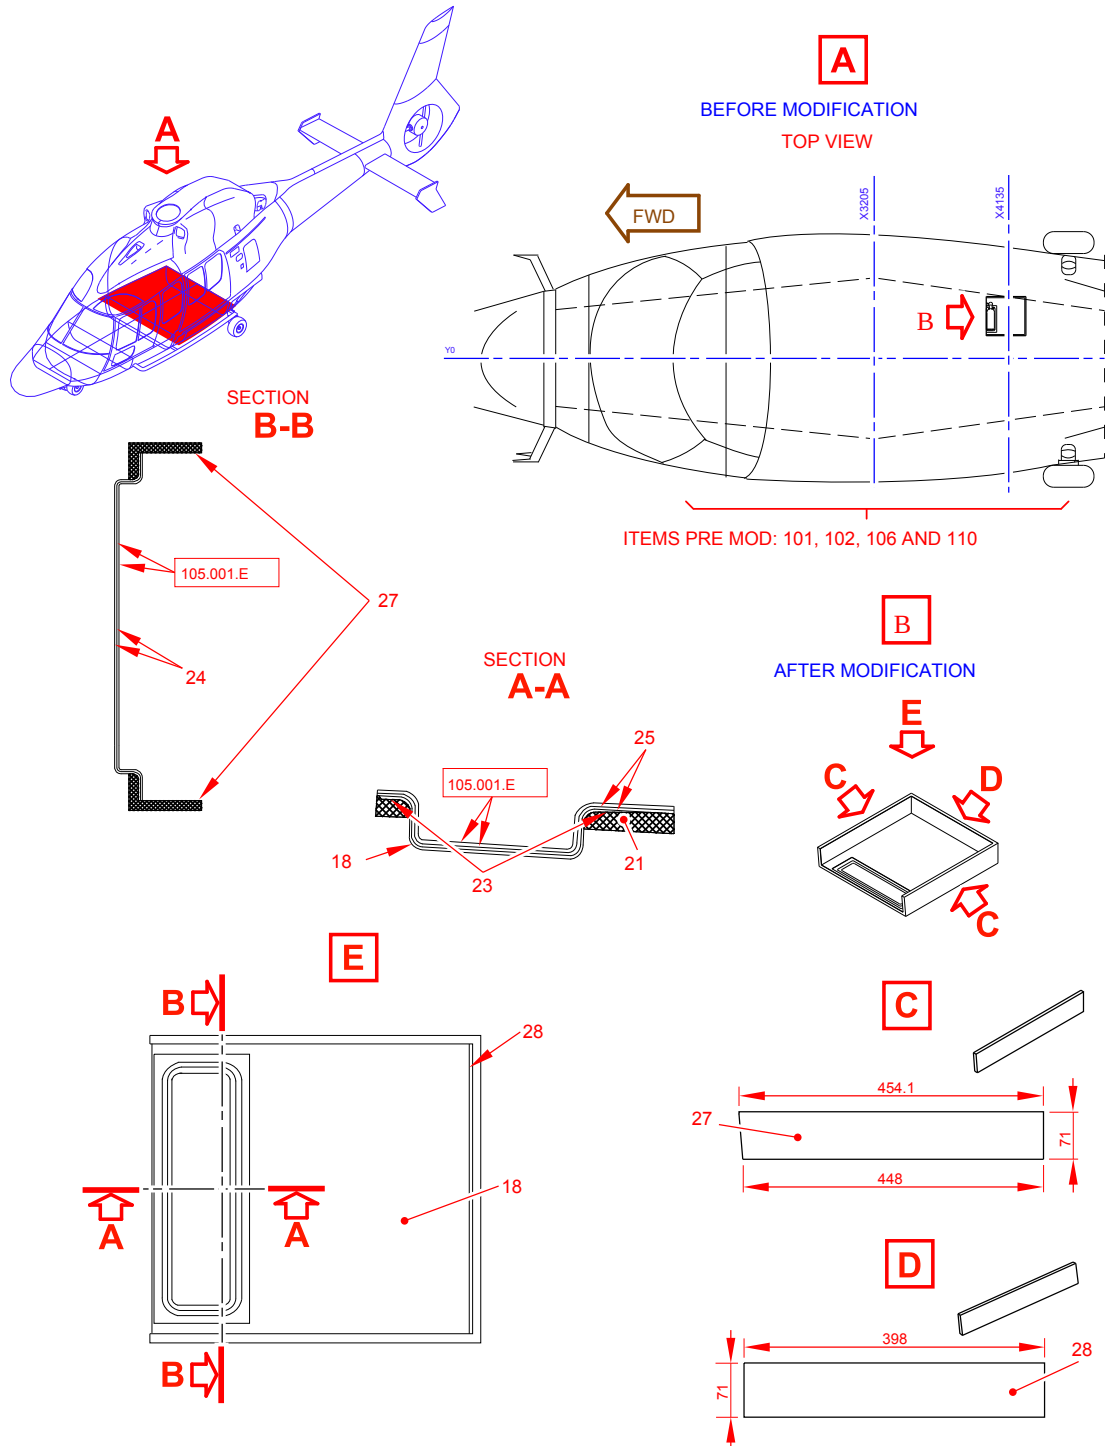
Position 7 = Procedure for manufacturing the drawer bottom
